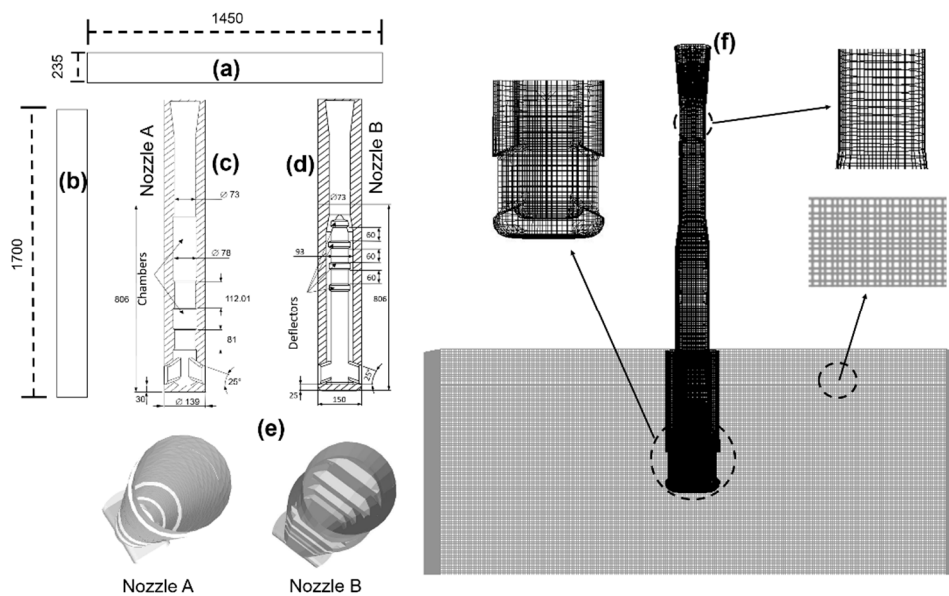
Geometries including dimensions of the model (mm), (a) upper view of the mold, (b) lateral view of the mold, (c) nozzle A dimensions, (d) nozzle B dimensions, (e) nozzle A and B on a perspective view, and (f) computational mesh with some close views.
